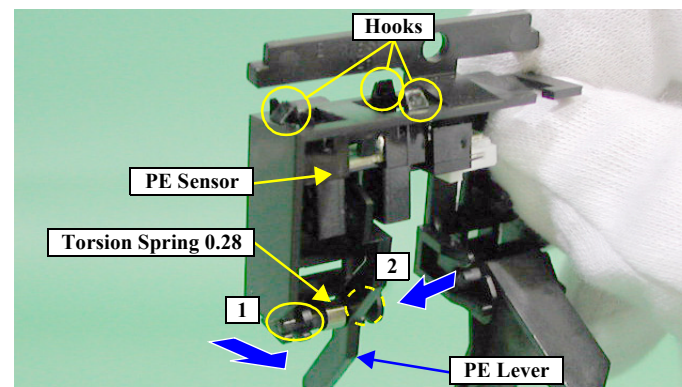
PE Sensor/PE Sensor Holder/PE Lever Removal 2
